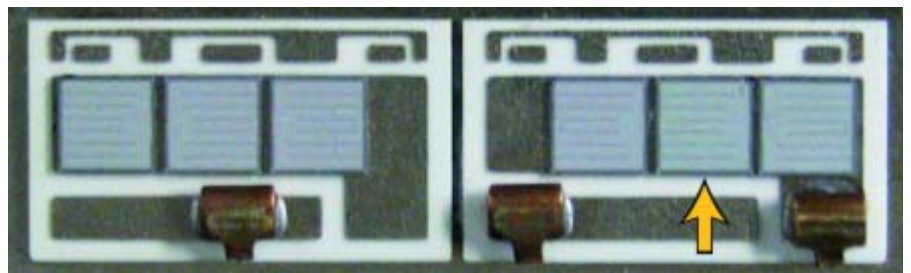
Optical photograph of the power device assembly. The die imaged in Figure 1 is marked by an arrow.
